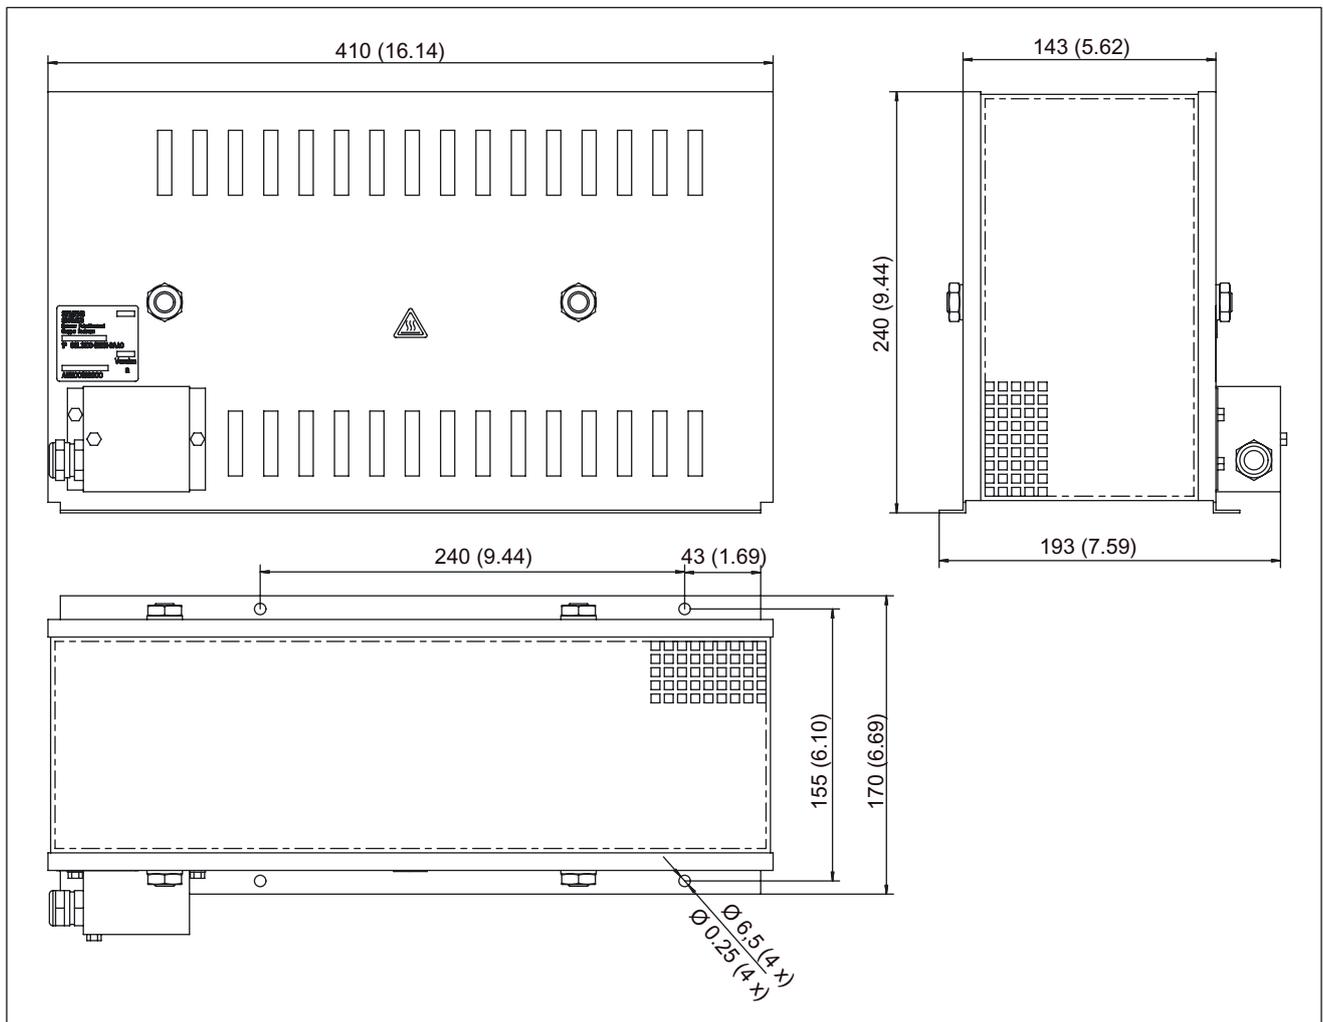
Dimension drawing: Braking resistor 1.5 kW / 100 kW
